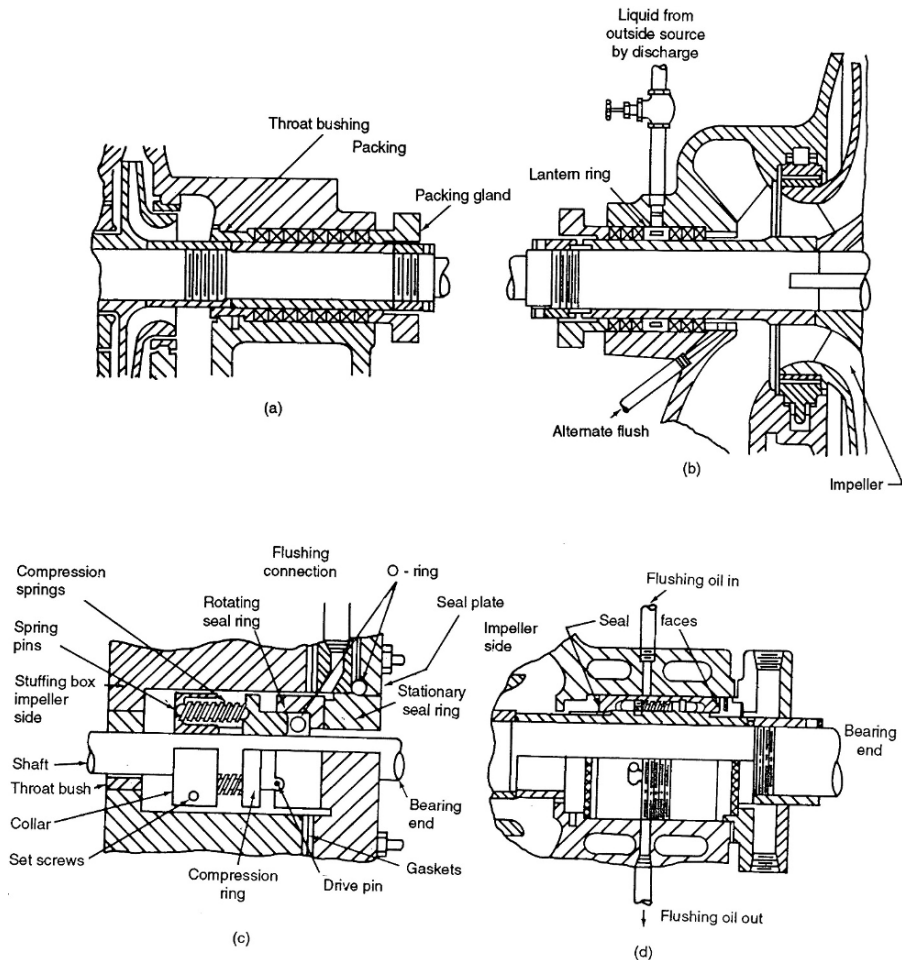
Pump shaft packing and seals. (a) Stuffing box completely filled with packing no lantern ring. (b) Externally sealed stuffing box. (c) Single Mechanical Seal. (d) Double Mechanical Seal.
